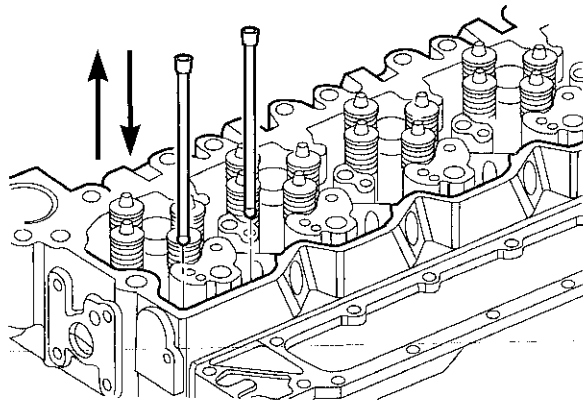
Rocker Arm and Pedestal Removal/Installation
